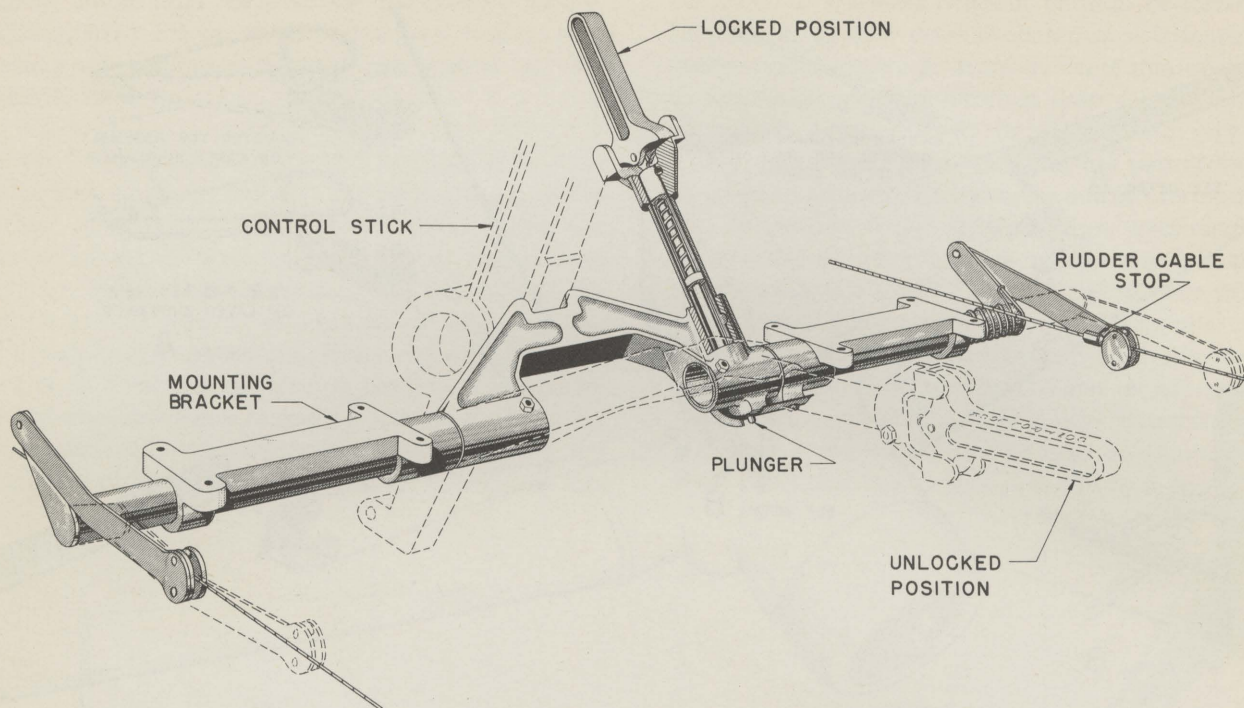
SURFACE CONTROL LOCK MECHANISM
